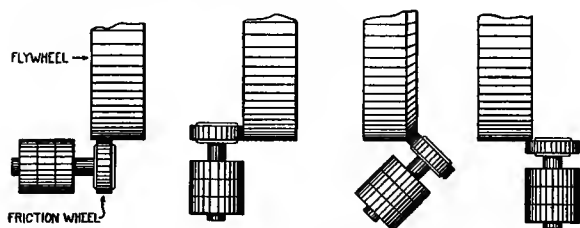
LOCATIONS OF FRICTION-DRIVE GENERATORS.
